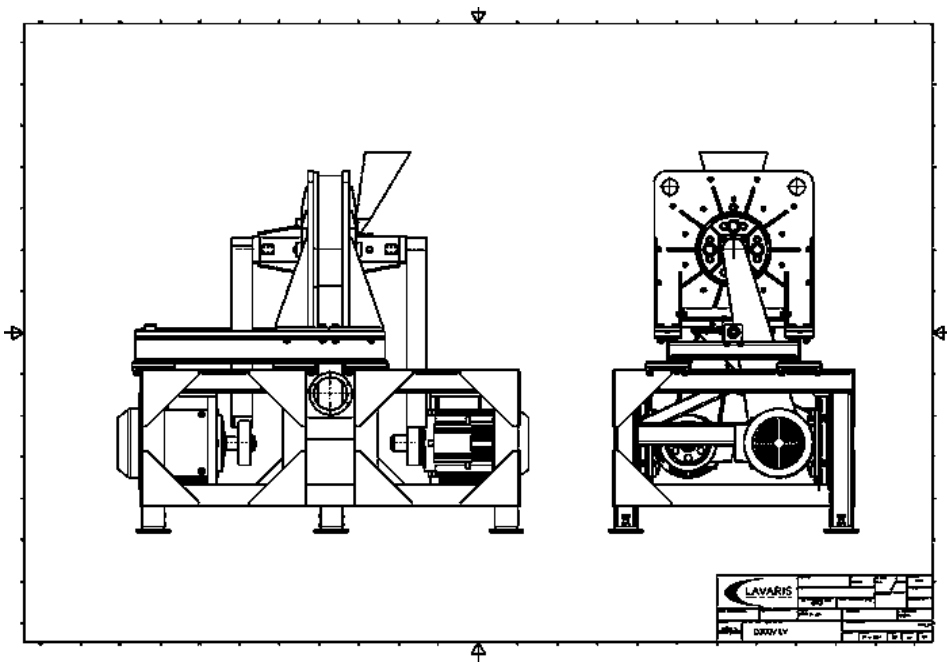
High-speed multilevel double rotors mill LAV 300/2R.
